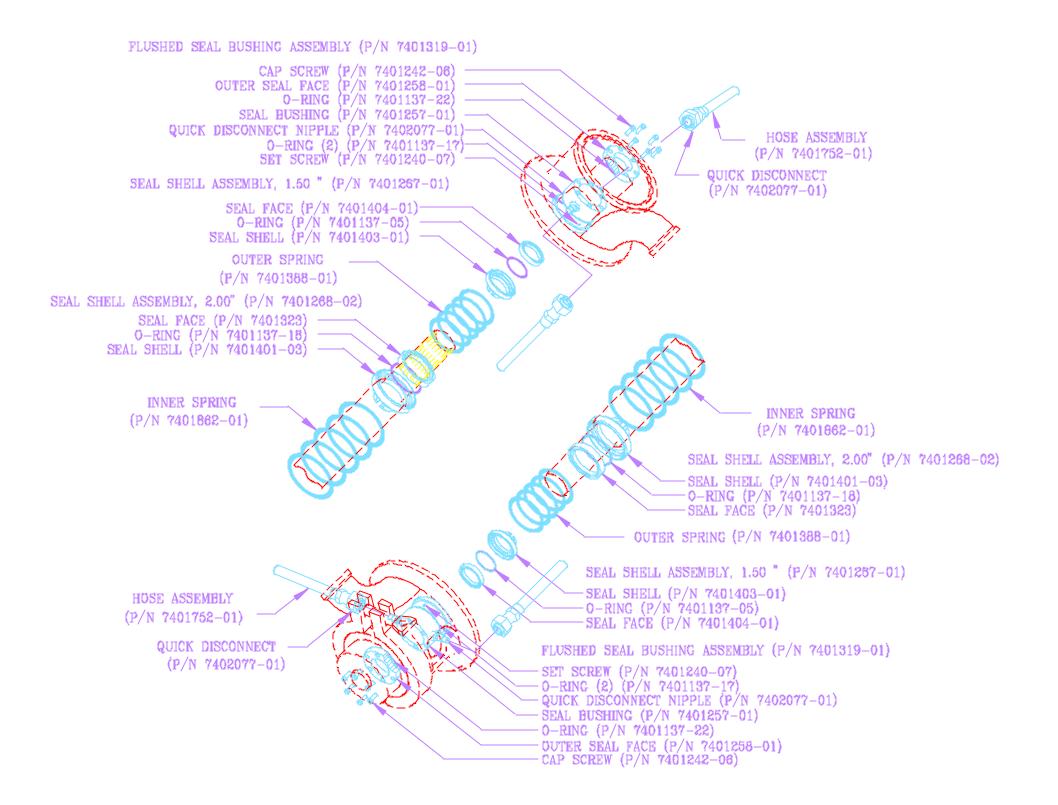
Flushed Standard And Flushed Hard Face Seal Assemblies, Cast Heads Backside of Figure 7-3 -- 11 x 17 foldout drawing
